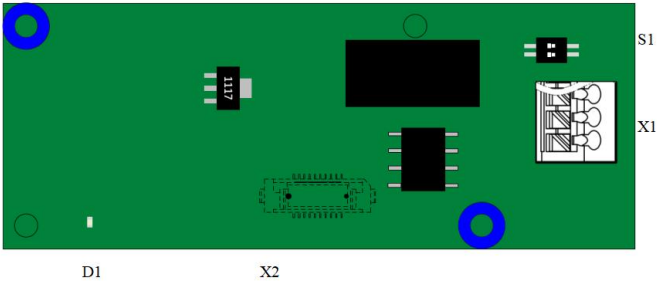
EMH-OPModule Expansion Card Interface Layout
